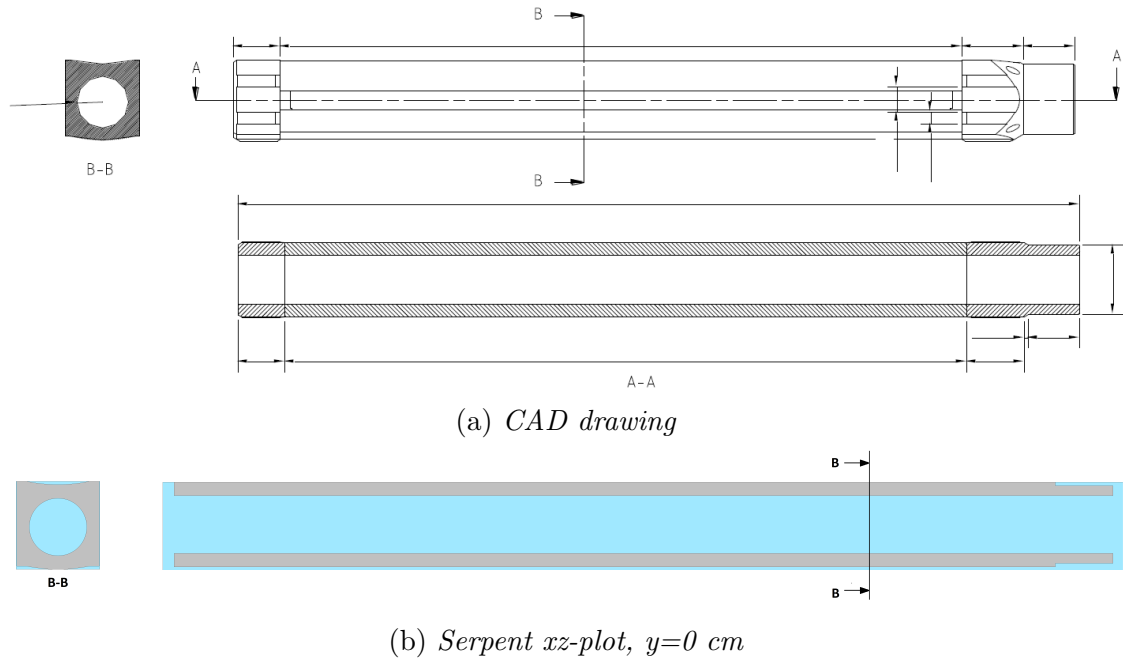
IS assembly adapter CAD drawing from the specifications [1] (a) and modeled with Serpent (b).
